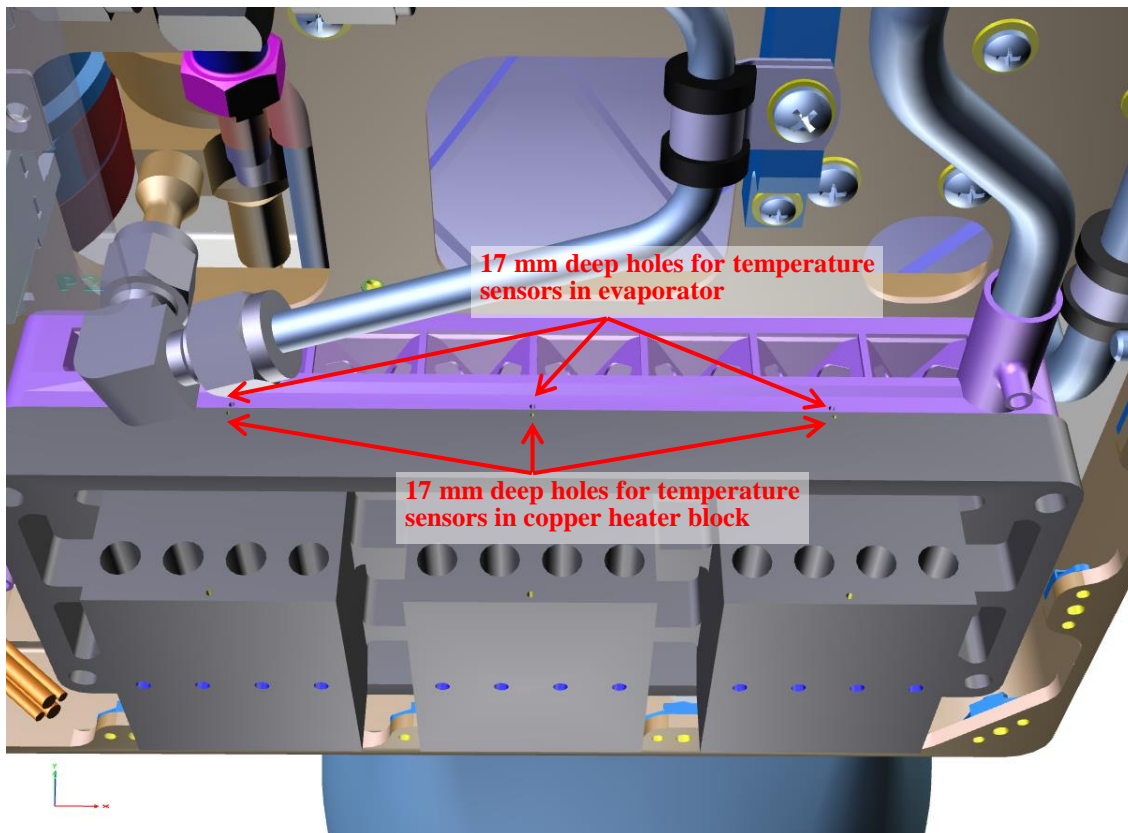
CAD drawing of the copper heater block mounted on the evaporator
